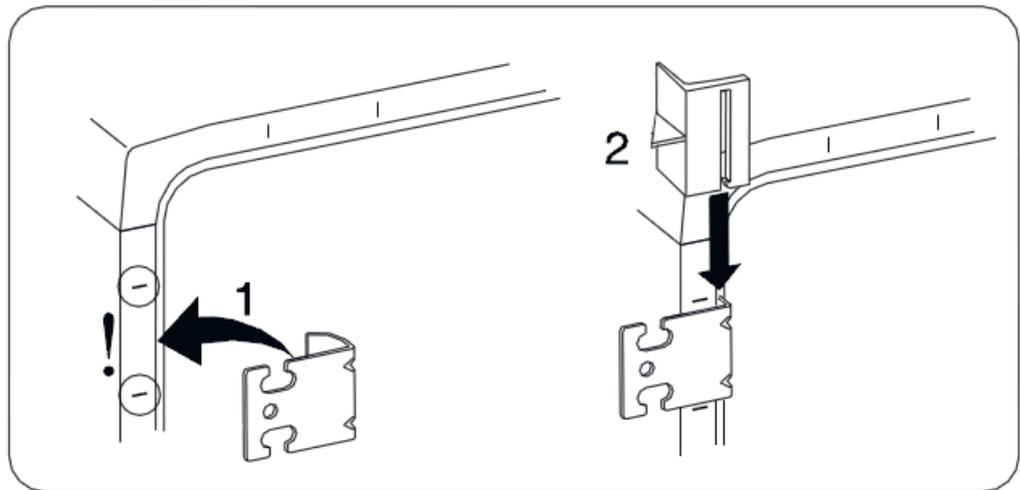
Hook the mounting lug in position and attach the securing bracket - example of side mounting
